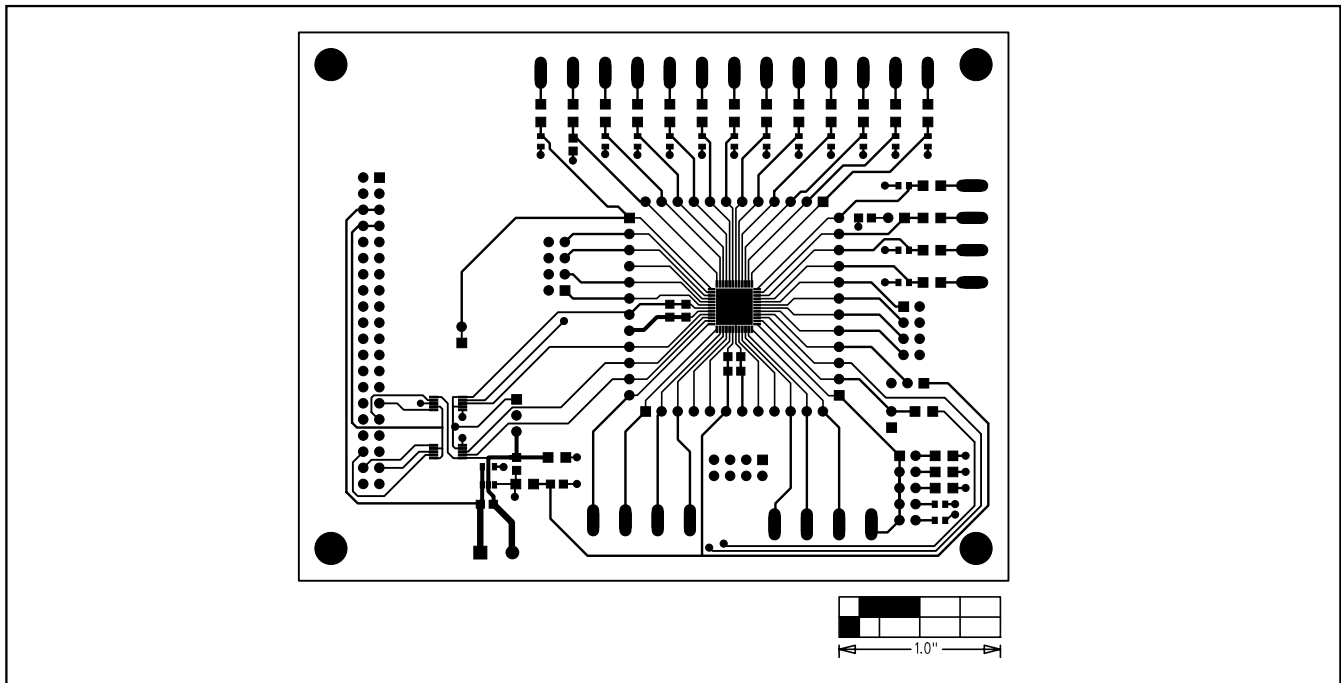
MAX1258 EV Kit PCB Layout—Component Side
